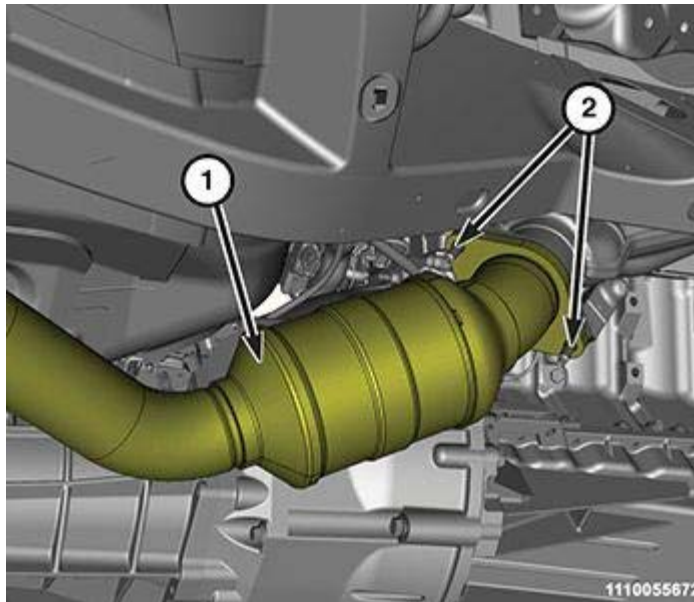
Catalytic Converter & Manifold Flange Nuts
